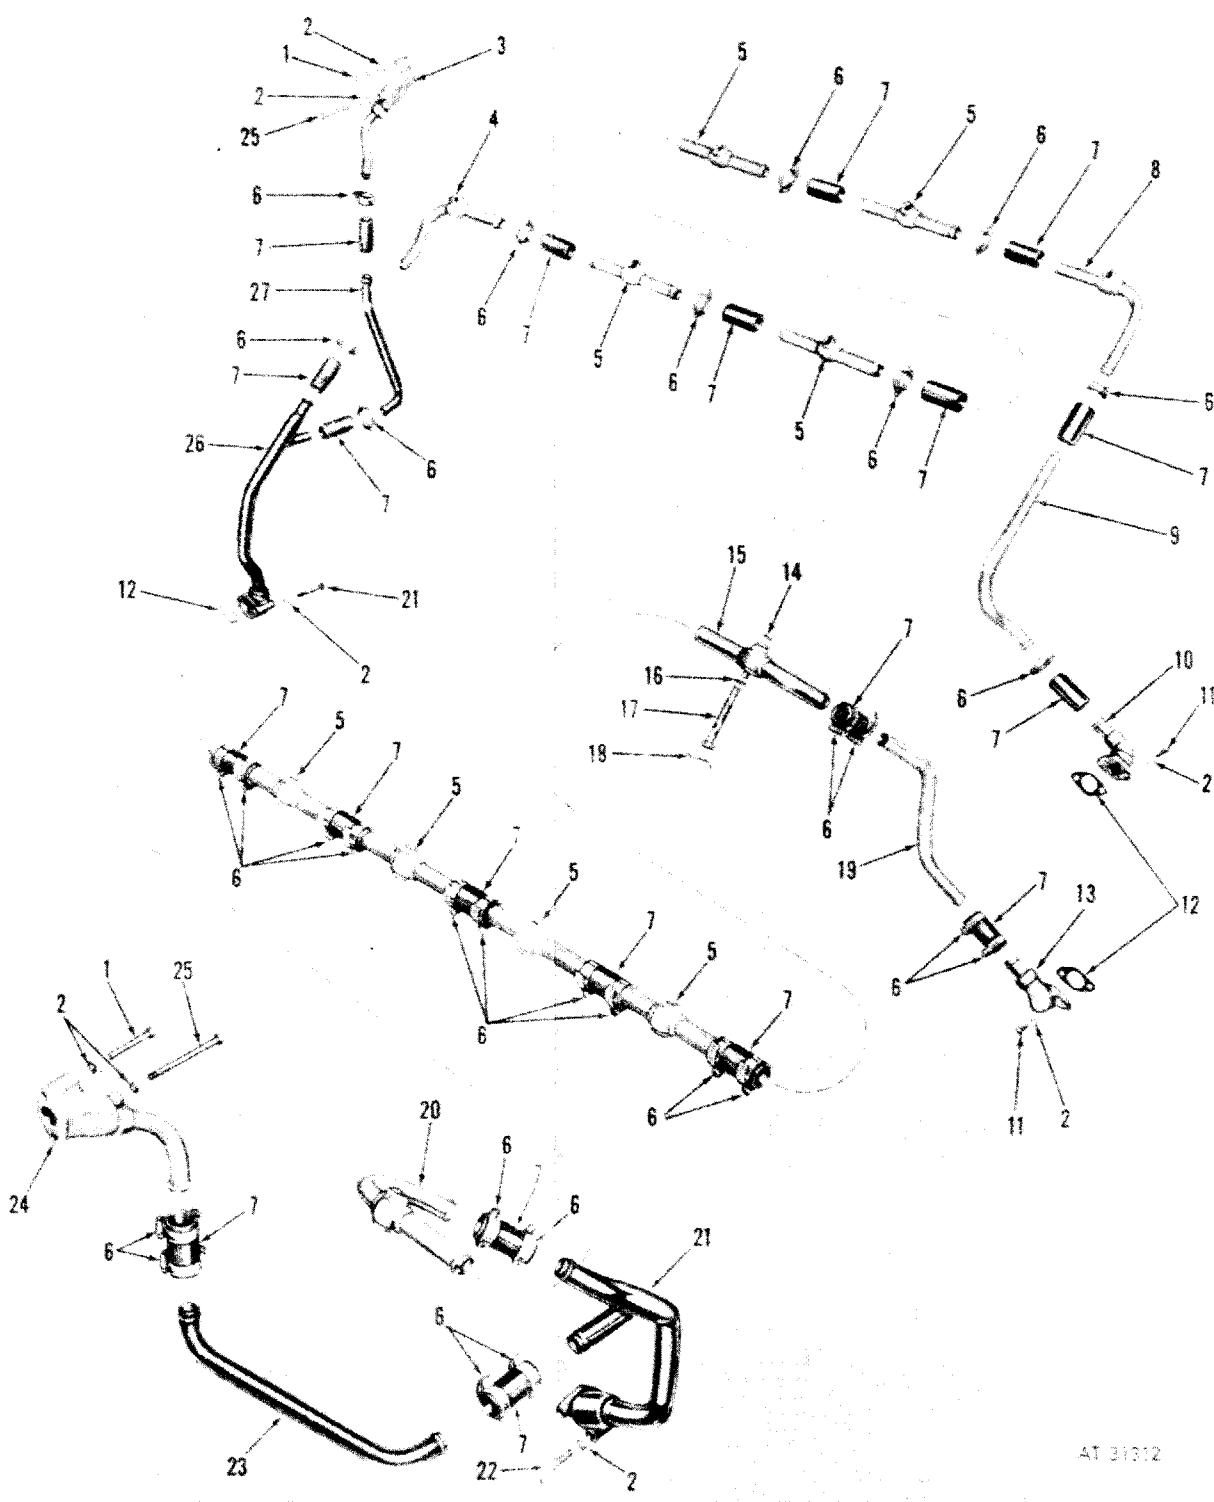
Oil Pump, Tubes and Associated Parts—Exploded View.
